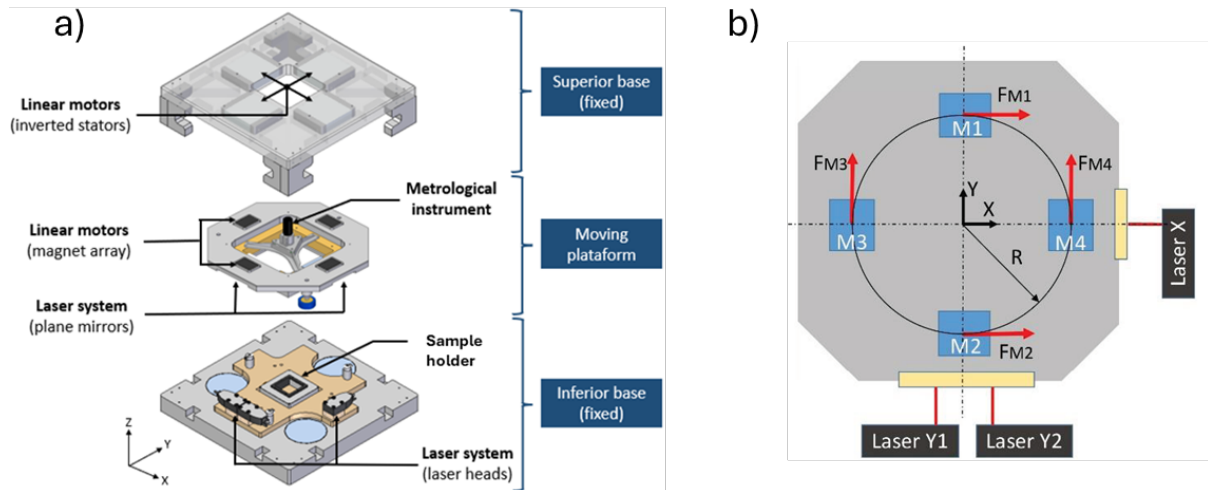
a) NanoPla Exploded view. b) Schematic top view of the moving platform and the laser heads
